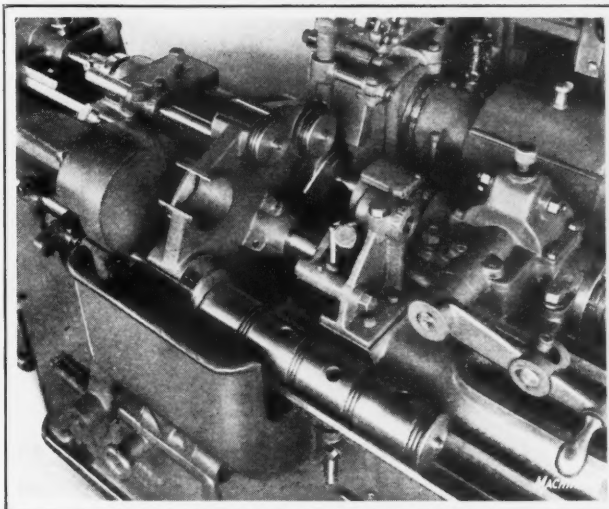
Grinding Machine shown in Fig. 1, arranged for grinding Pistons
